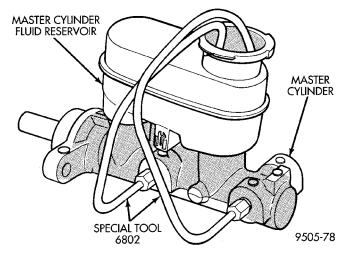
Bleeding Tubes Attached to ABS Master Cylinder
